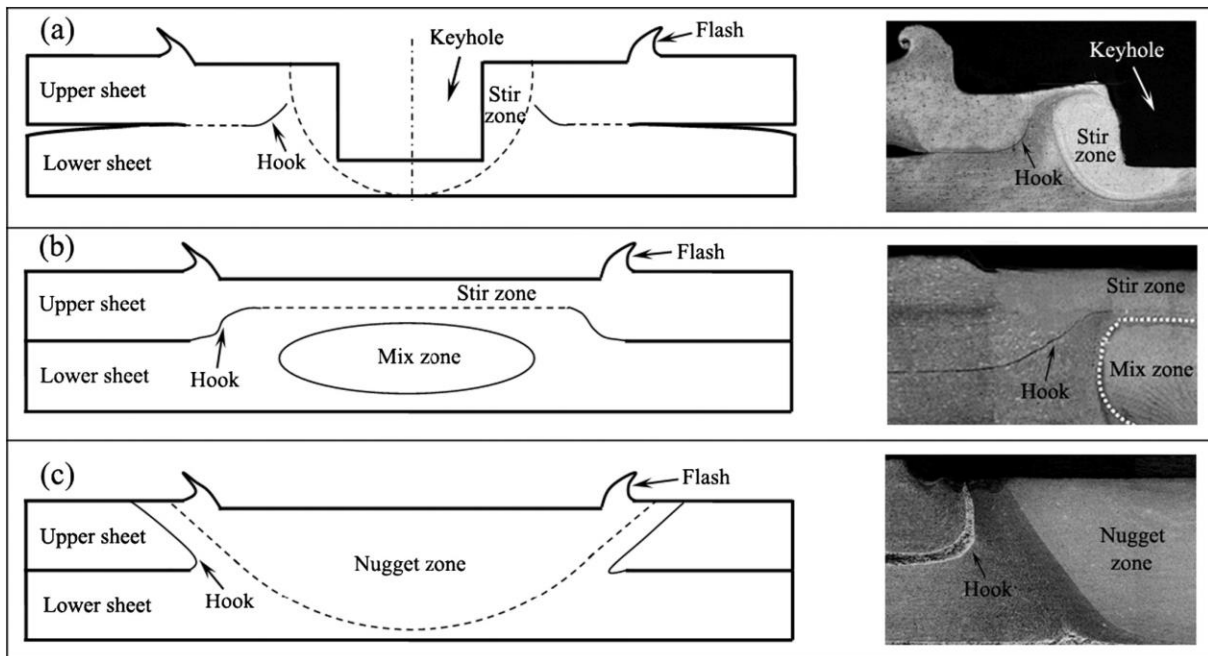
Schematic illustration and macrographs of the hook defects inside of welds produced by: (a) CFSSW [124]; (b) RFSSW [72]; (c) PLT-FSSW [17]
